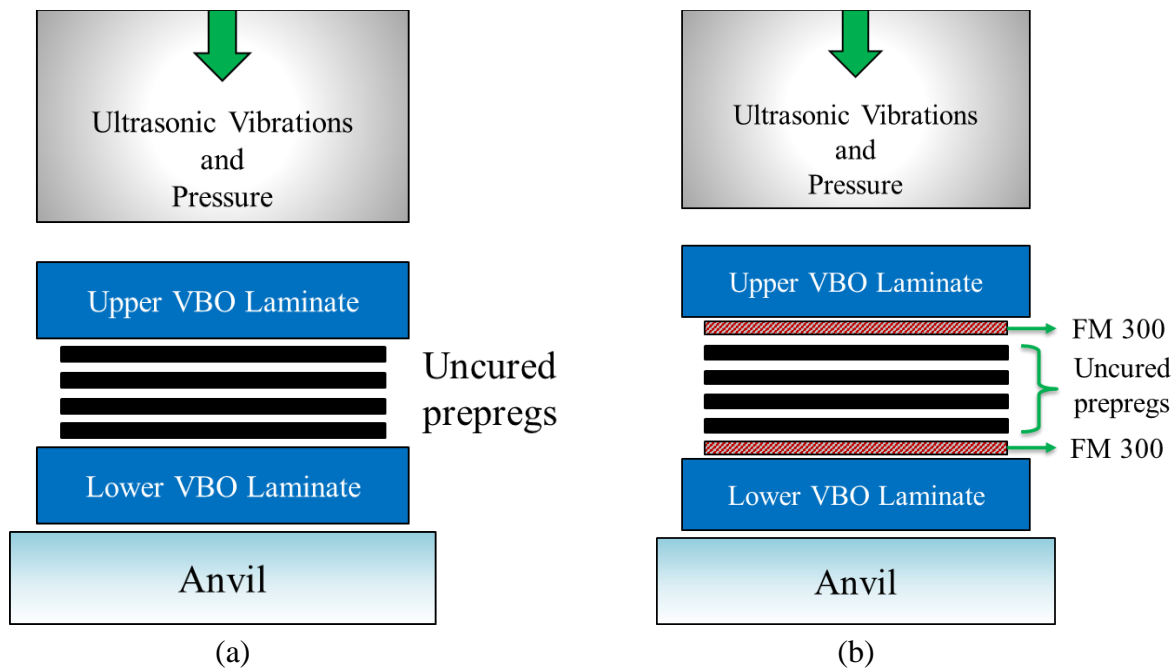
Welding setup for short beam shear samples: (a) without adhesive film and (b) with adhesive film (FM 300-2M).
